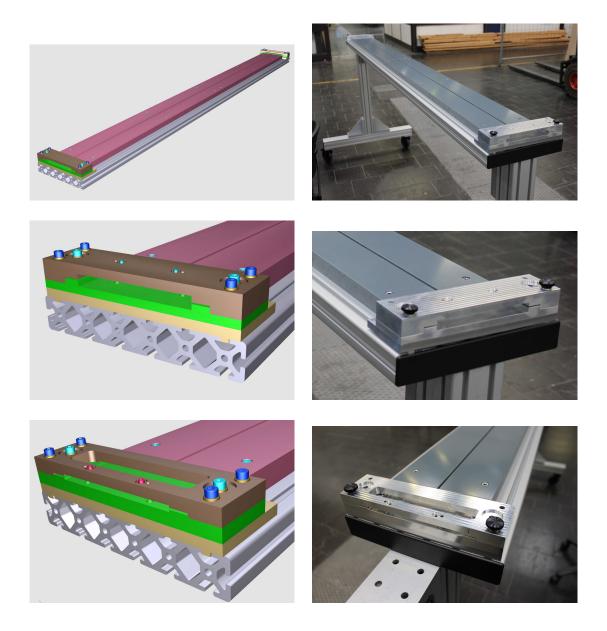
Multi Purpose Jig: Drawing and photo of jig (top), drawing and photo of bracket endpiece readout side (middle), drawing and photo of bracket endpiece mirror side (bottom)
